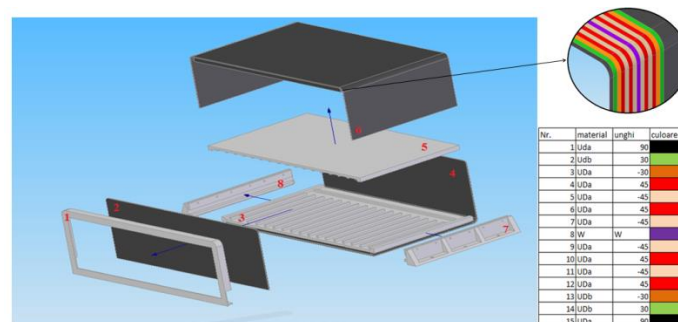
Parts of the composite electronic housing space structure (Optimized CAD model following FEA results): 1- frontal frame; 2- CFRP frontal panel; 3- Lower electronic components integration
